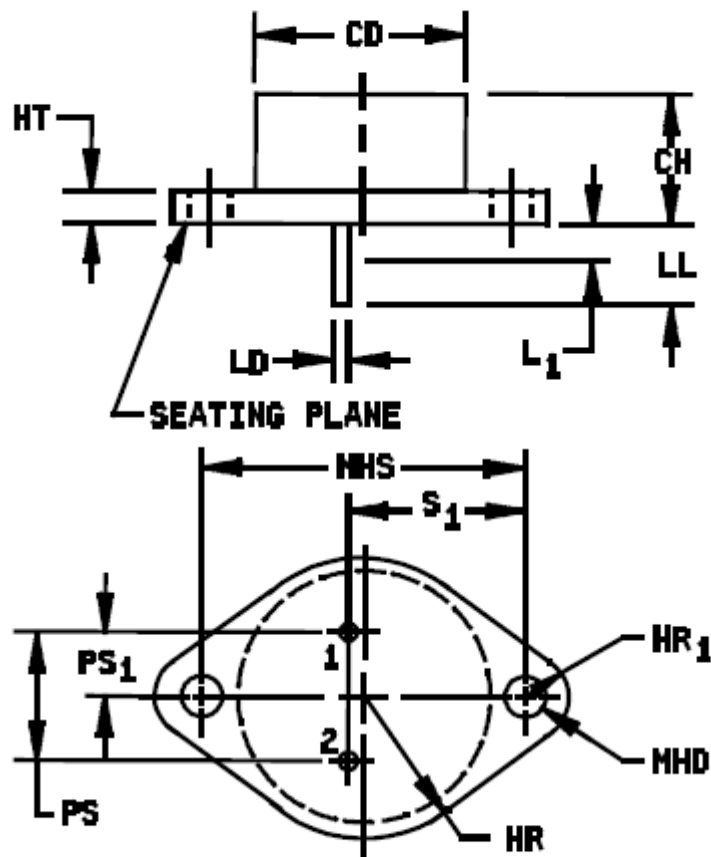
Physical dimensions (similar to TO-204AA formerly TO-3).
